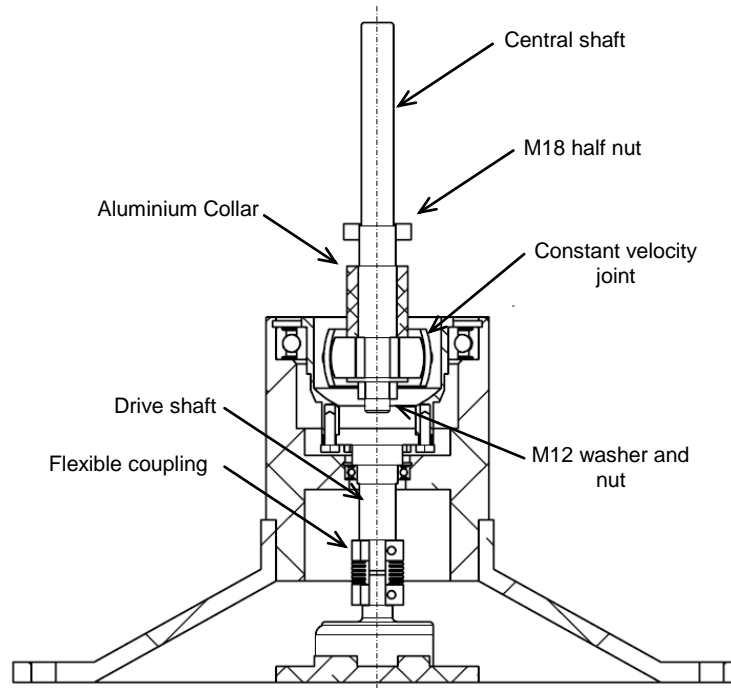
Section of disc drive mechanism showing bearing location and CV joint
